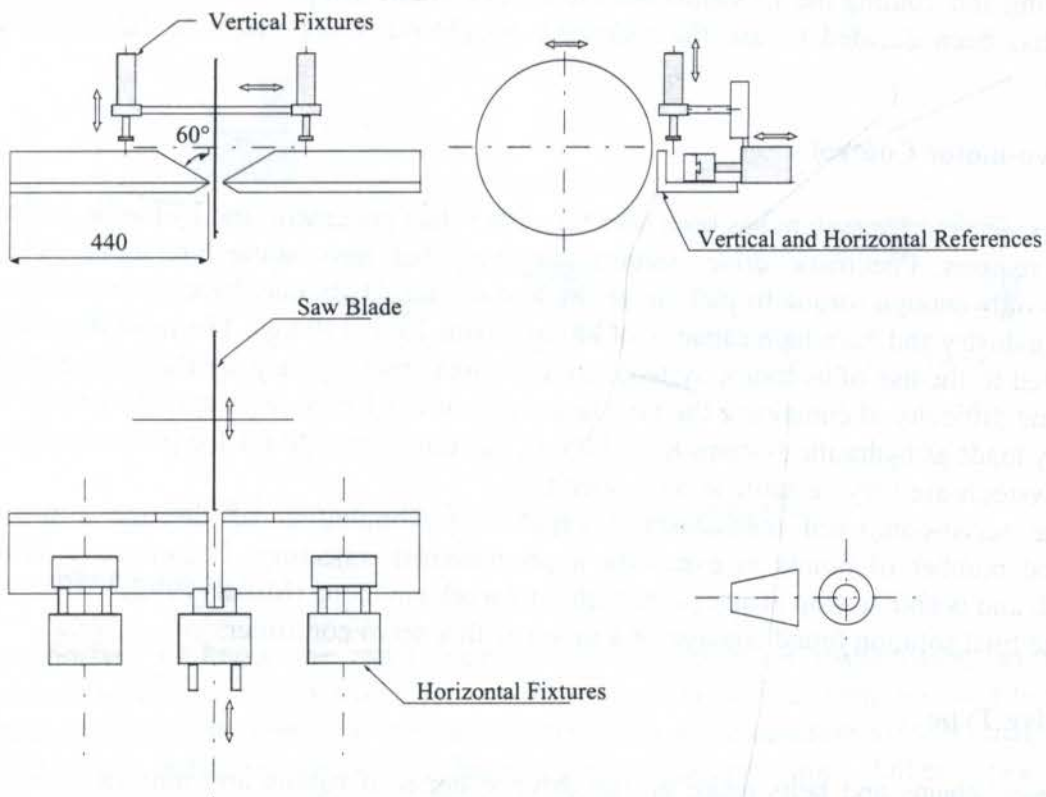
Scheme of cutting area. Saw blade, Vertical and Horizontal References and Fixtures (front, top and side views).
